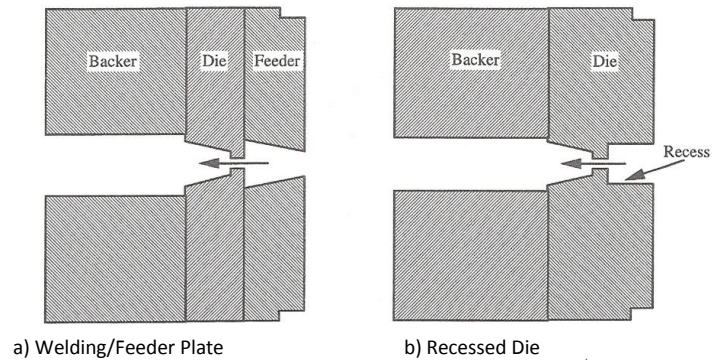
Configurations used for billet-on-billet extrusion on Solid Dies [22].
